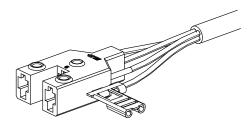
Compressor motor cable and earth for VEM compressor series
